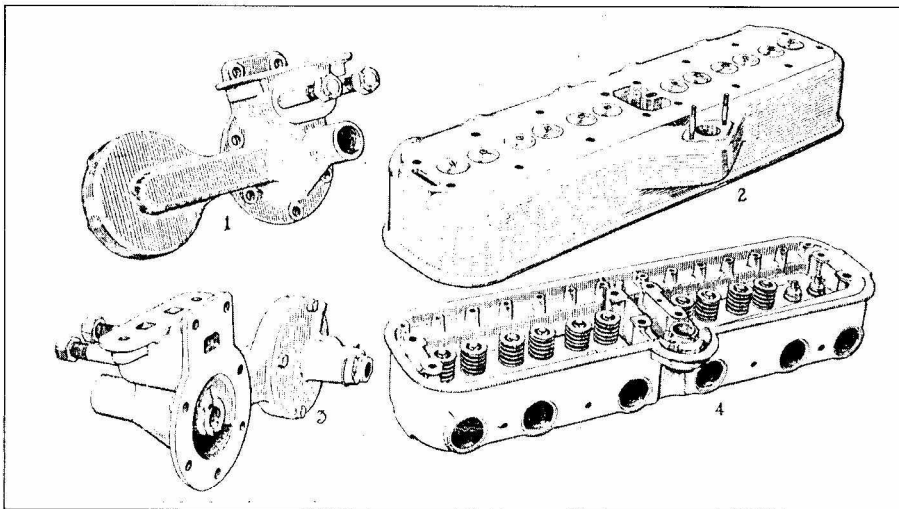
Views 1 and 3 showing water pump, which also forms base support for radiator; views 2 and 4 show bottom and top view head of motor; (The Automobile, December 18, 1913, p. 1166).
